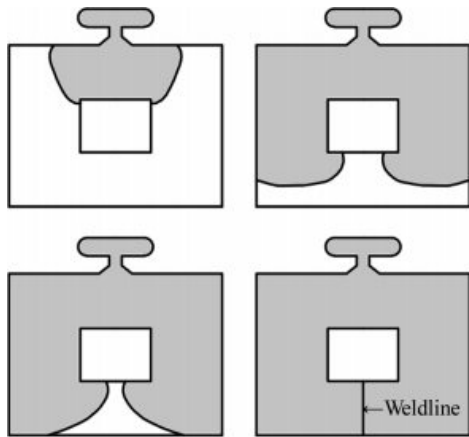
Schematic drawing of weldline formation in injection molding process.
